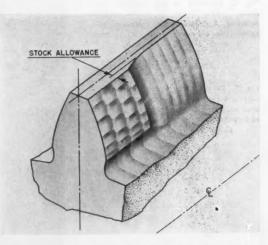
The feed marks seen here were produced during finishing operation on the flank of a spur gear tooth.
